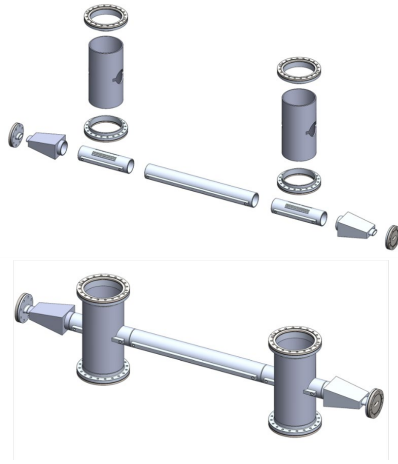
Exploded view of the middle straight dummy chamber assembly showing all major components.
